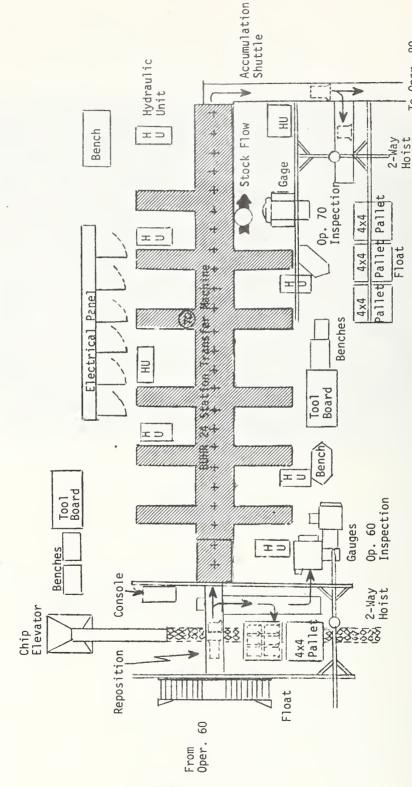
OPERATION 70 CYLINDER BLOCK MACHINING
